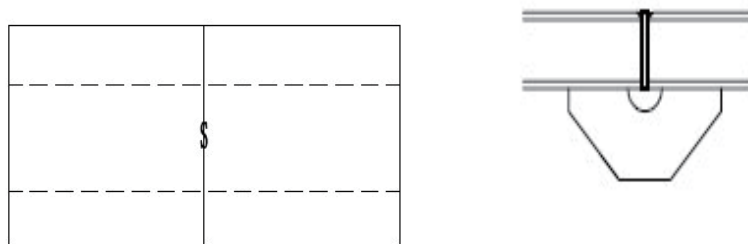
Connection of stiffened plate not at transverse primary member and transverse bulkhead ”
